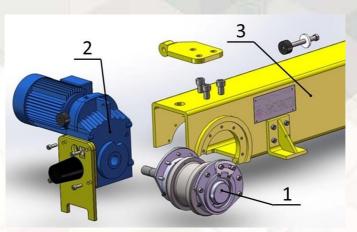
Arrangement of a cylindrical bushing on a longitudinal girder of an overhead crane:1 - cylindrical box; 2 - gear motor; 3-longitudinal beam
